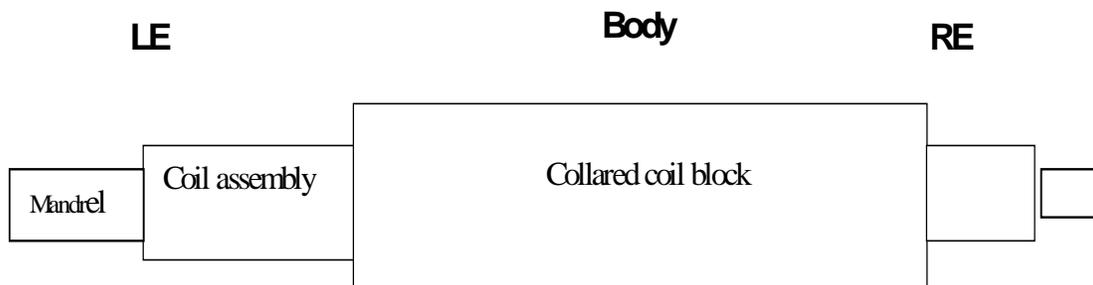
Collared coils with coil assembly on the mandrel.
